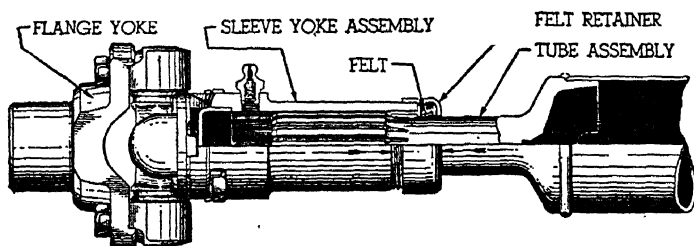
Sliding Splined Tubular Propeller Shaft with Universal Joint Member.
